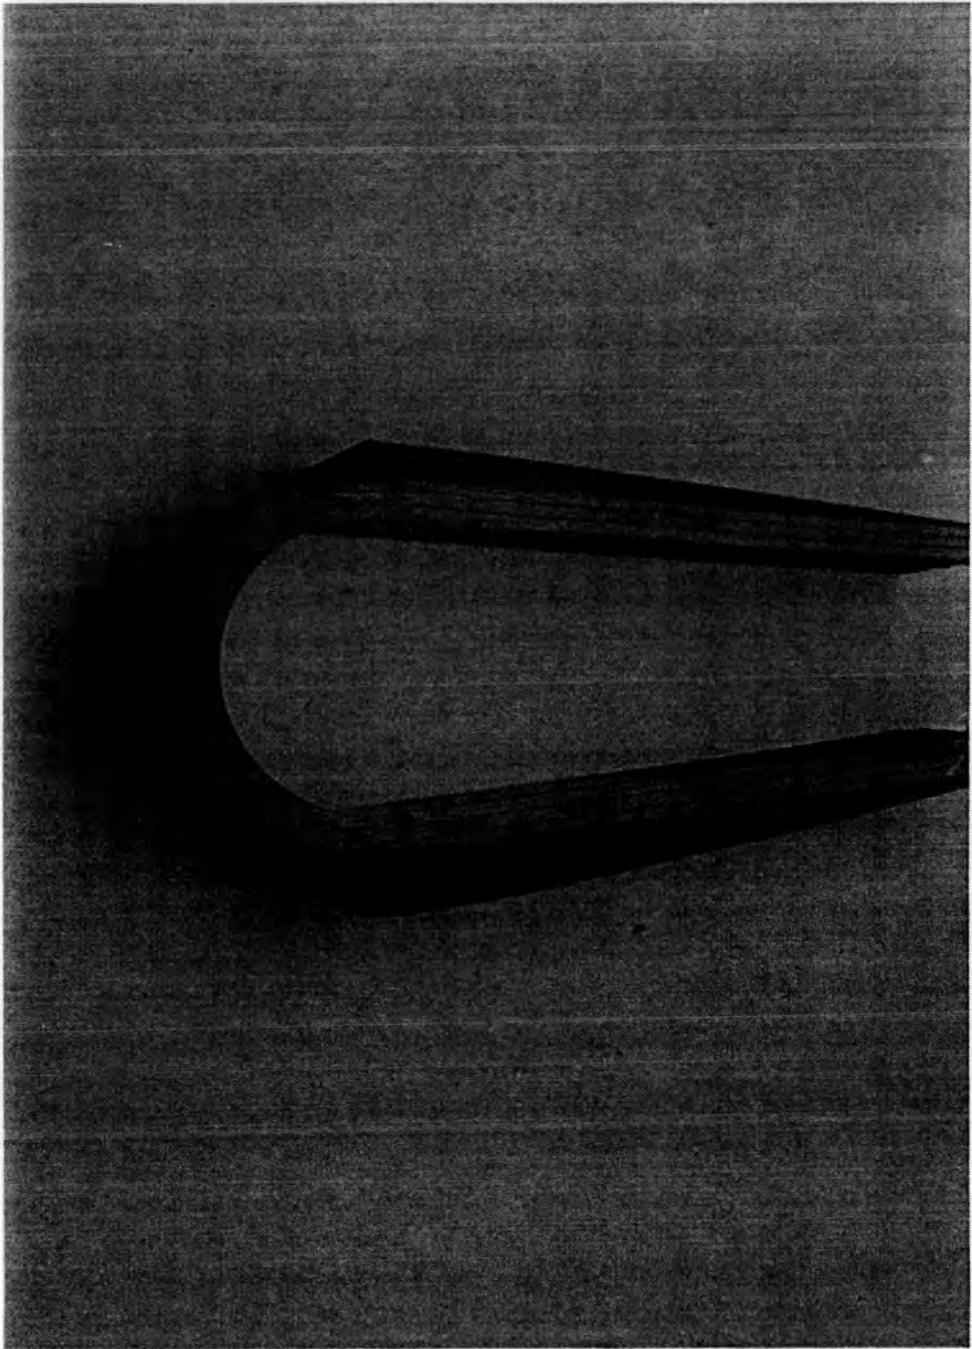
Cross Section of Root Manufactured via Lay-Up Station (Trial III)
